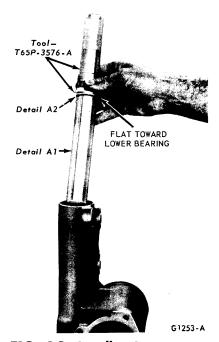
Installing Lower Bushing In Steering Gear Housing
